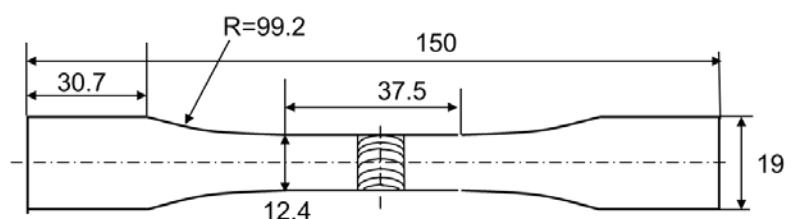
Specimen geometry used for fatigue tests to compare effect of weld condition
